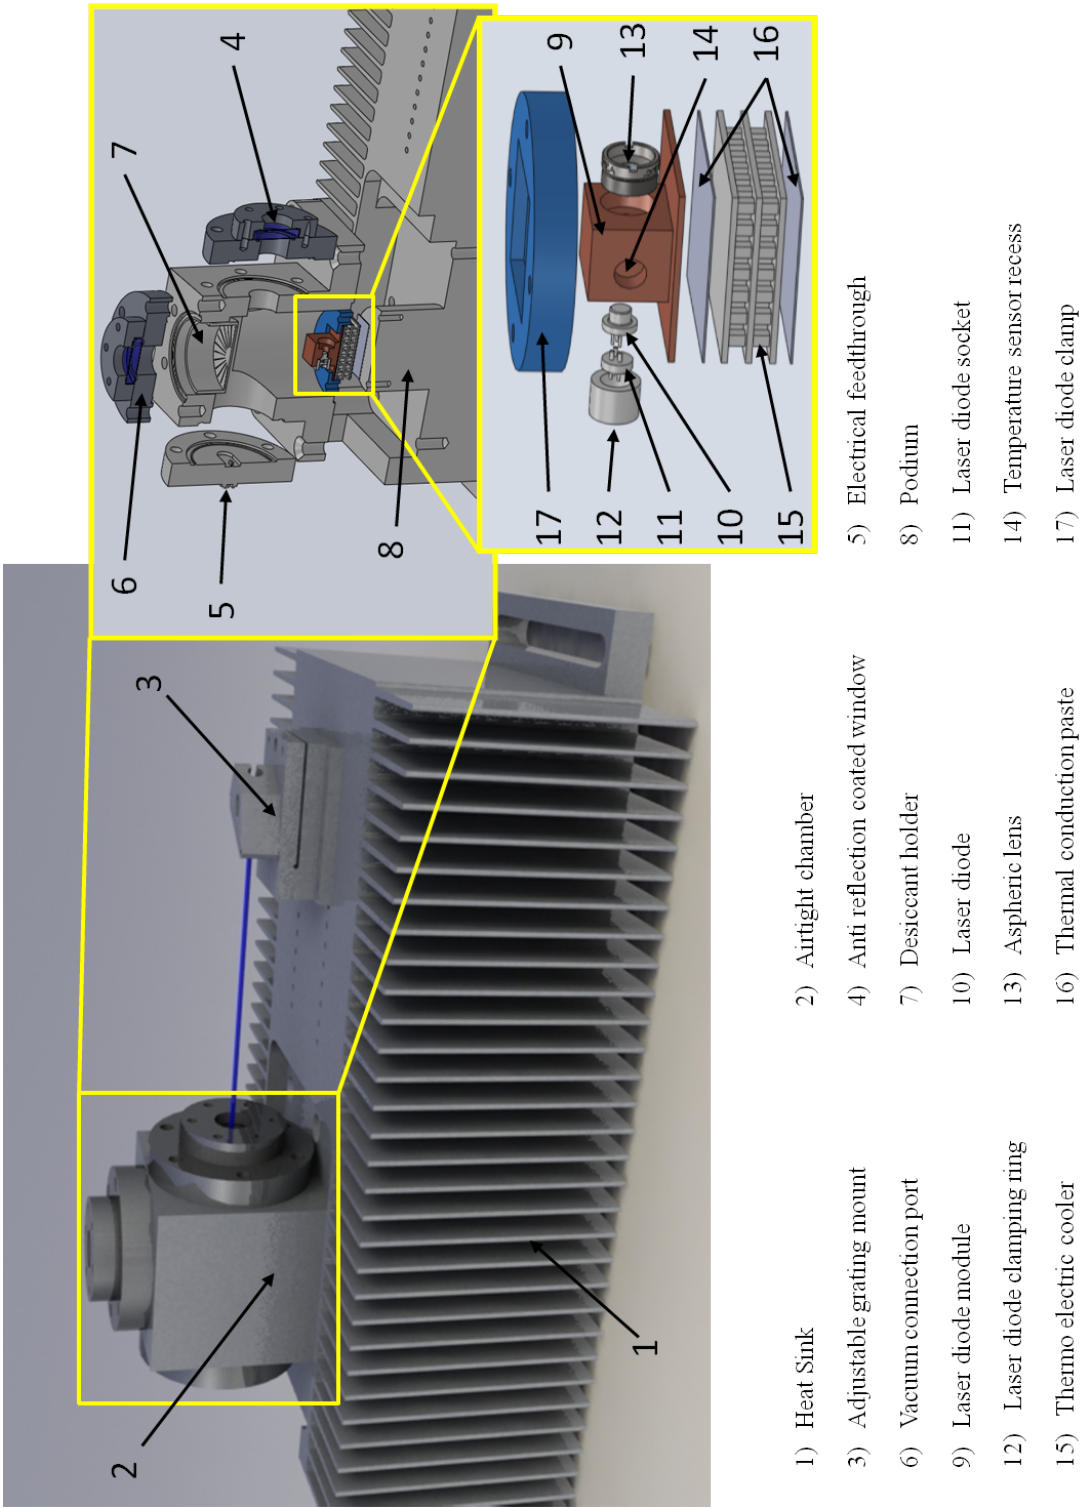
Overview of the laser system showing the external arrangement, an exploded view of the isolating chamber and an exploded view of the laser diode module.
